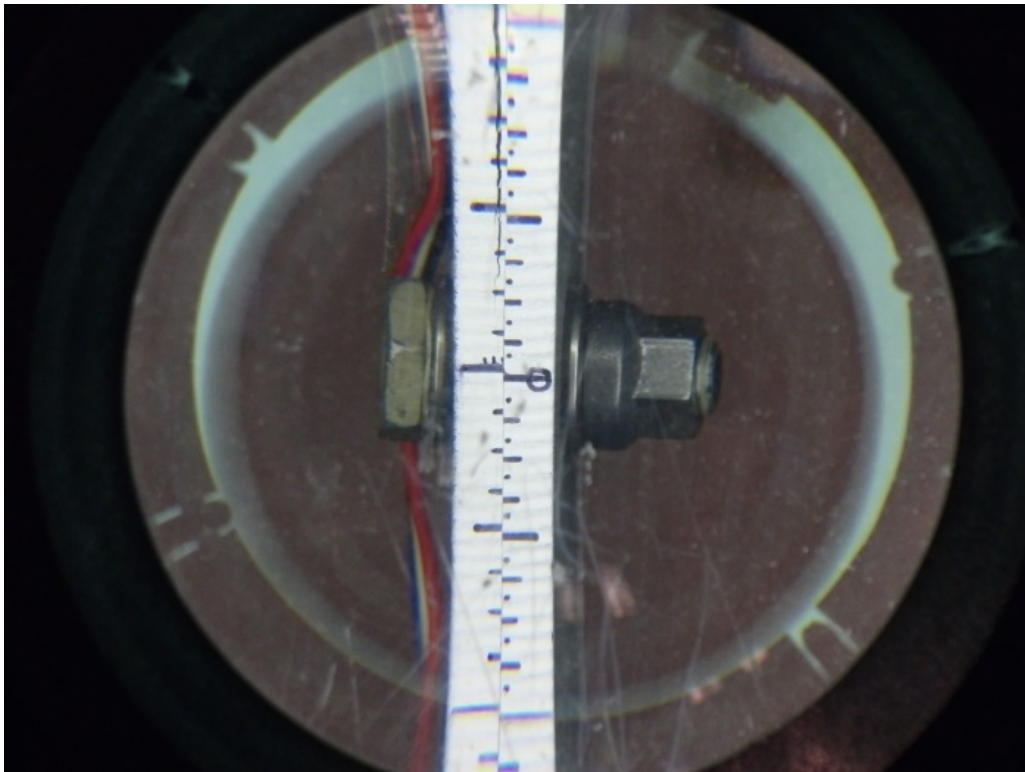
Visual tracking of crack-tip location—propagated past the fastener [3]
